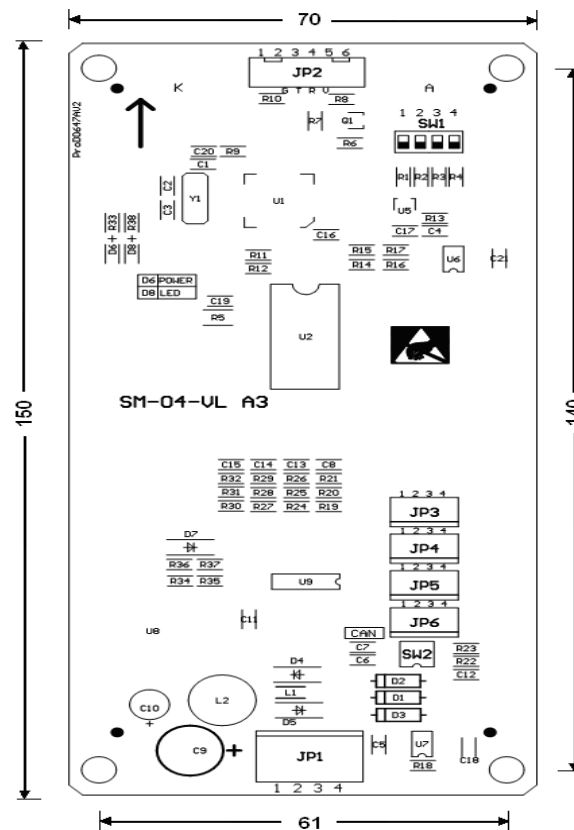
Mounting Dimensions of SM-04-VL/A
